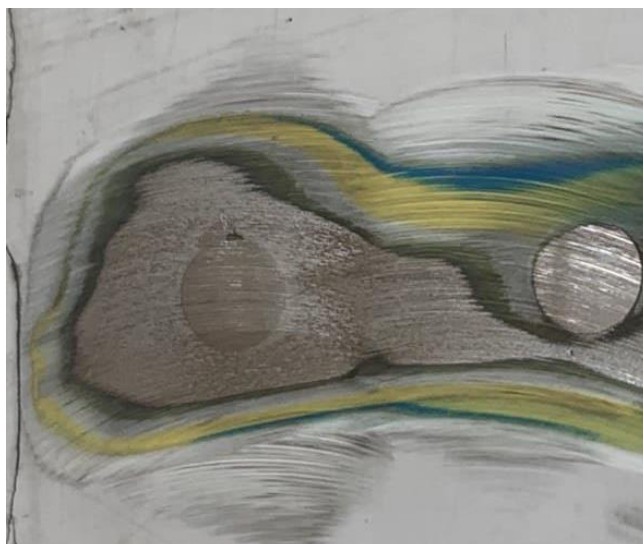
Initial crack formation in the rivet joint.
